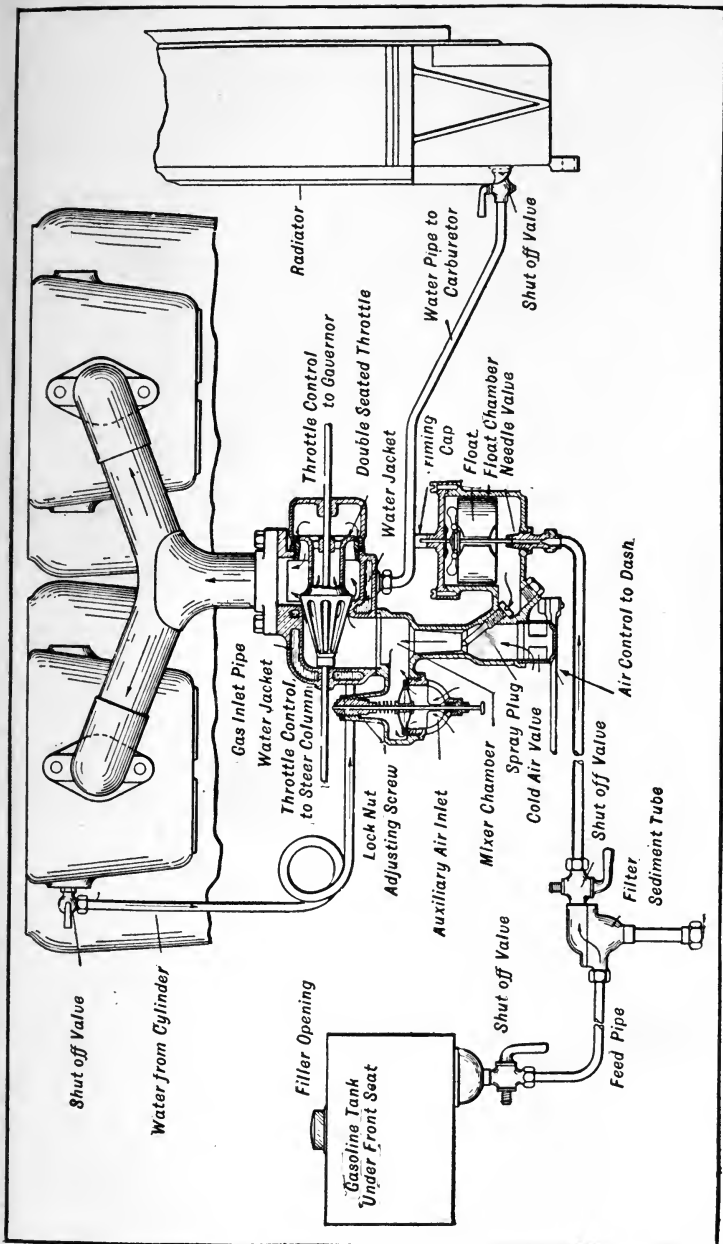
Complete Fuel System Used on Some Models of Peerless Cars, Showing Method of Supplying Carburetor with Fuel and Joining It to Cylinders.
